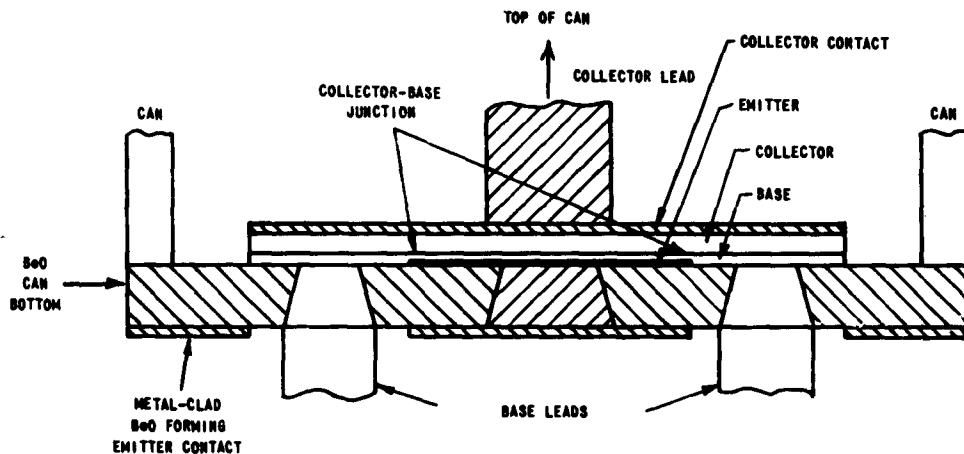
SUGGESTED MOUNTING ARRANGEMENT.
